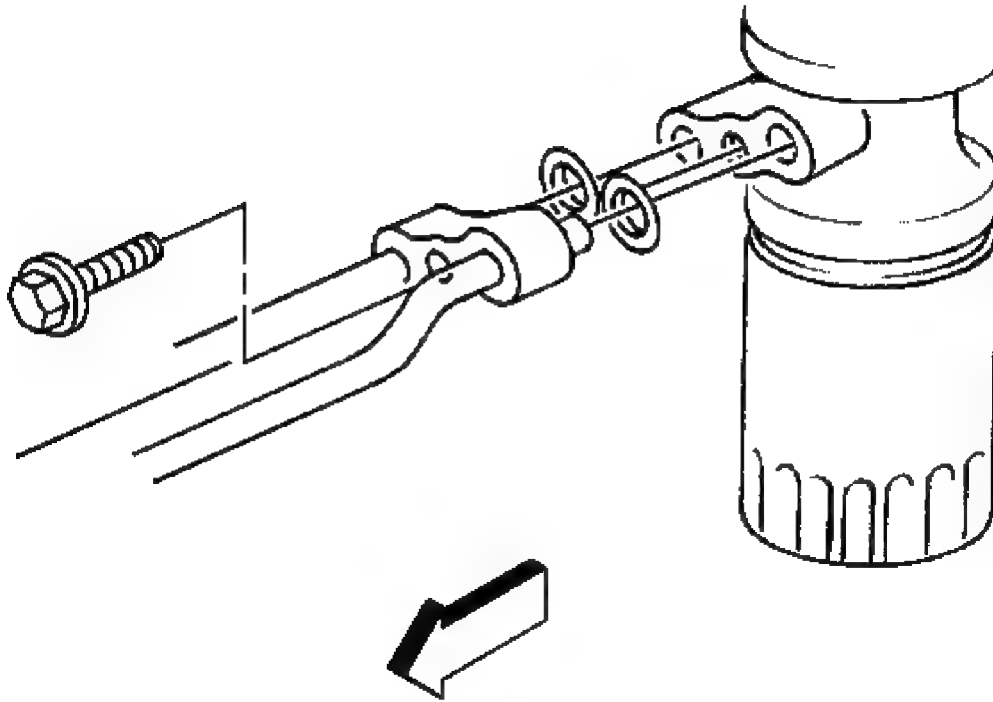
Locating Engine Oil Cooler Pipe Bolt
